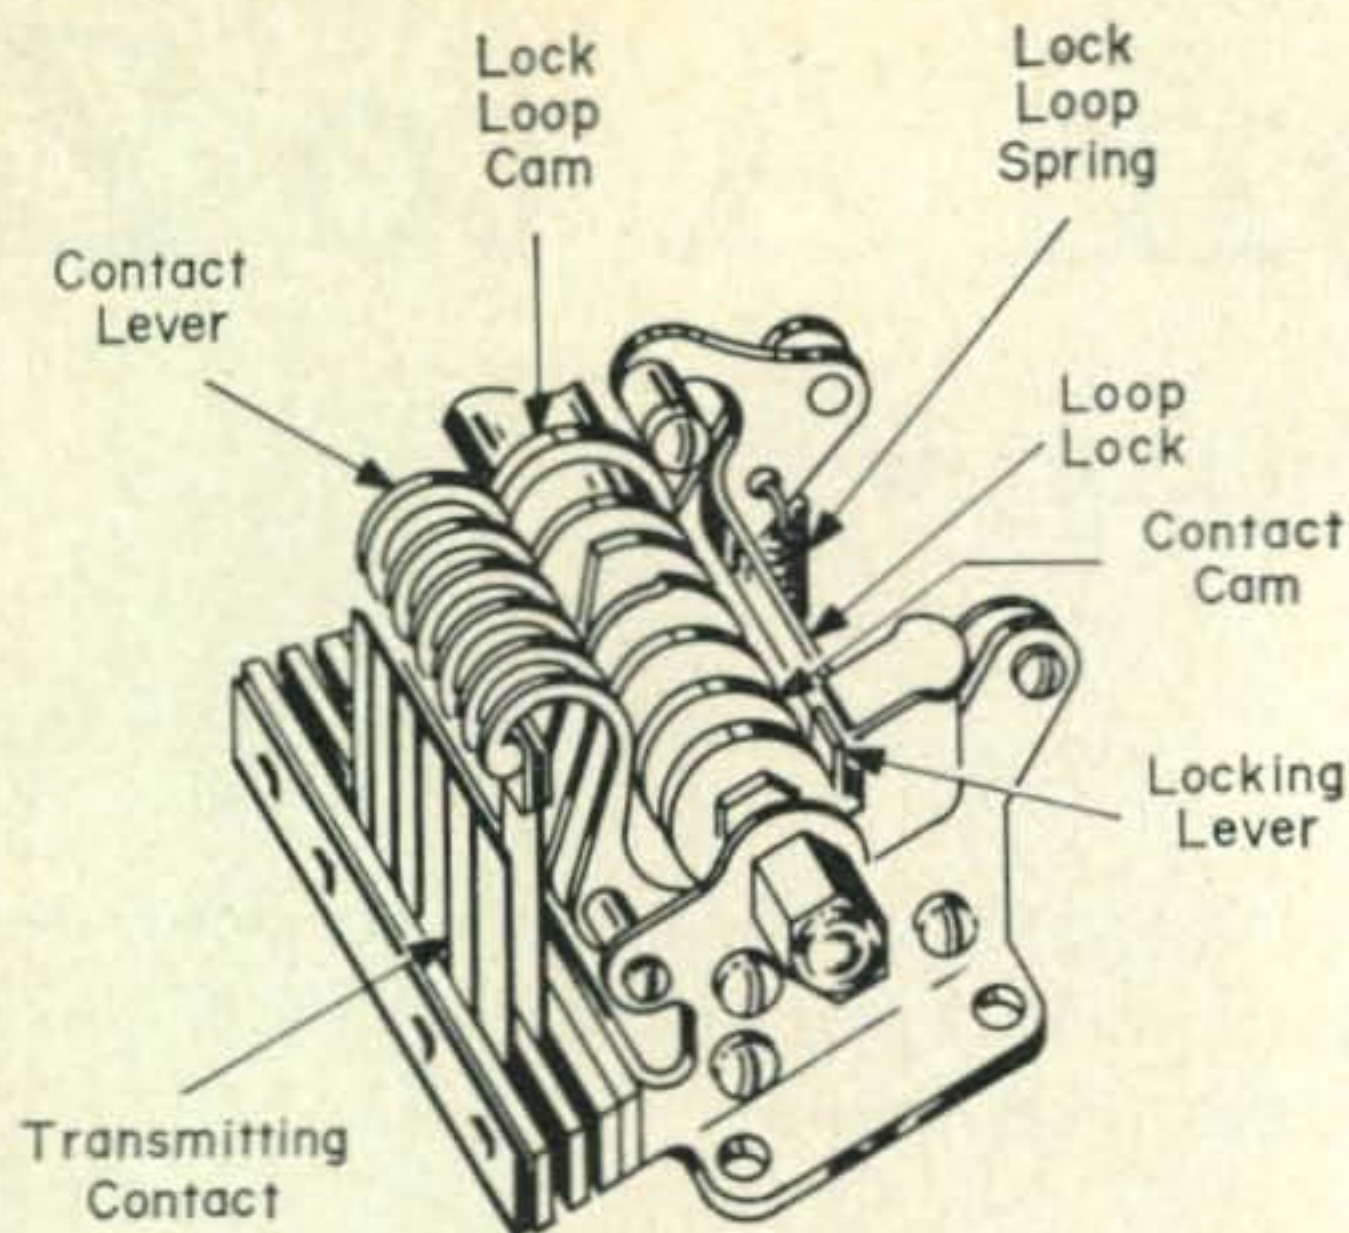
Line drawing of only the transmitter mechanism identifying the major parts.
